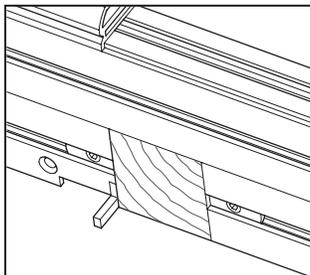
Key setting for 1/8" (3mm) finger joints.
